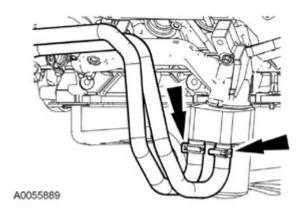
Locating Oil Cooler Coolant Hoses Clamps Courtesy of FORD MOTOR CO.
